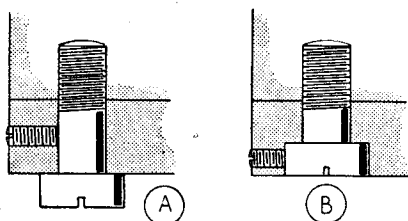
"A"—projecting bolt-head secured with set-screw; "B"—recessed bolt-head
